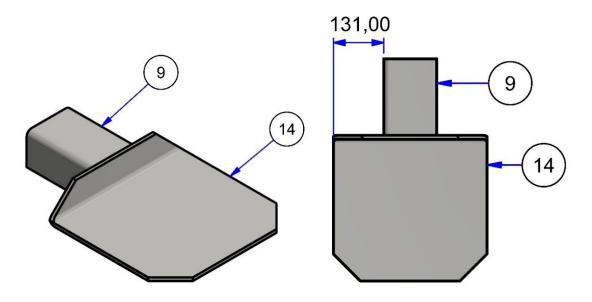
(Assembly 1 – Standard Wheel Rest Plate and Outer Sleeve)
